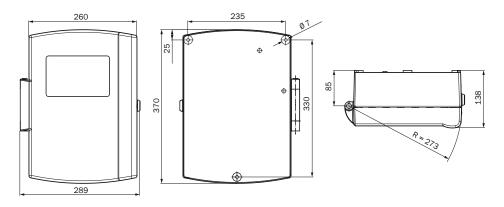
Fitting the control unit AWE (sheet steel enclosure version), dimensions in mm
